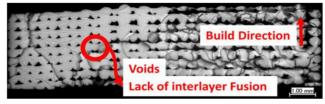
Micro fractographs of 3D printed samples using FDM. Different raster orientations plays and important role in mechanical behavior of parts [7]
